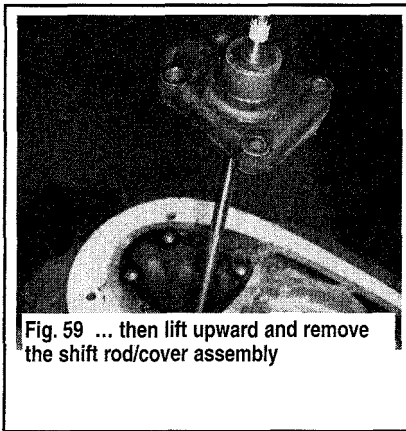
then lift upward and remove the shift rod/cover assembly
